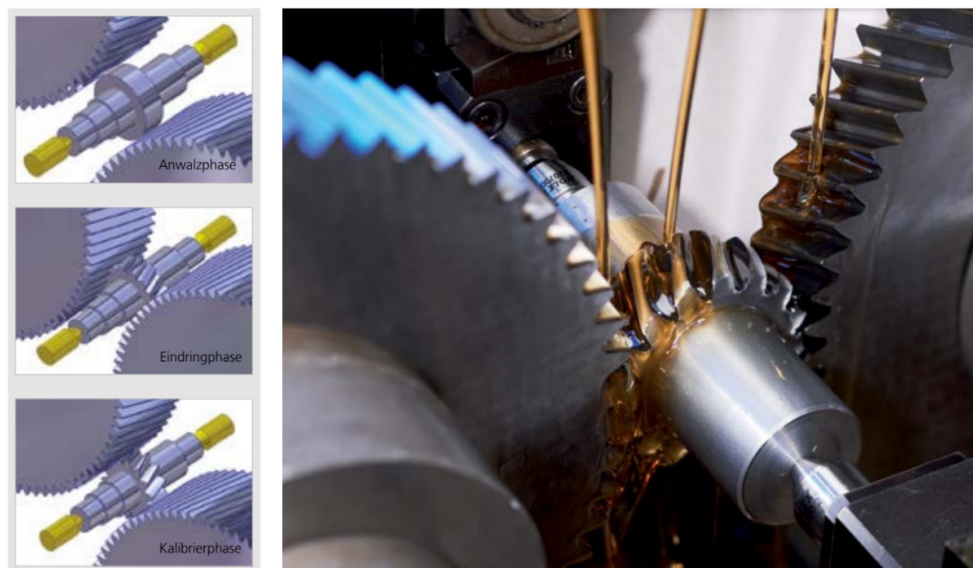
Model (left) and real appearance (right) of the helical gearing rolling [7].
